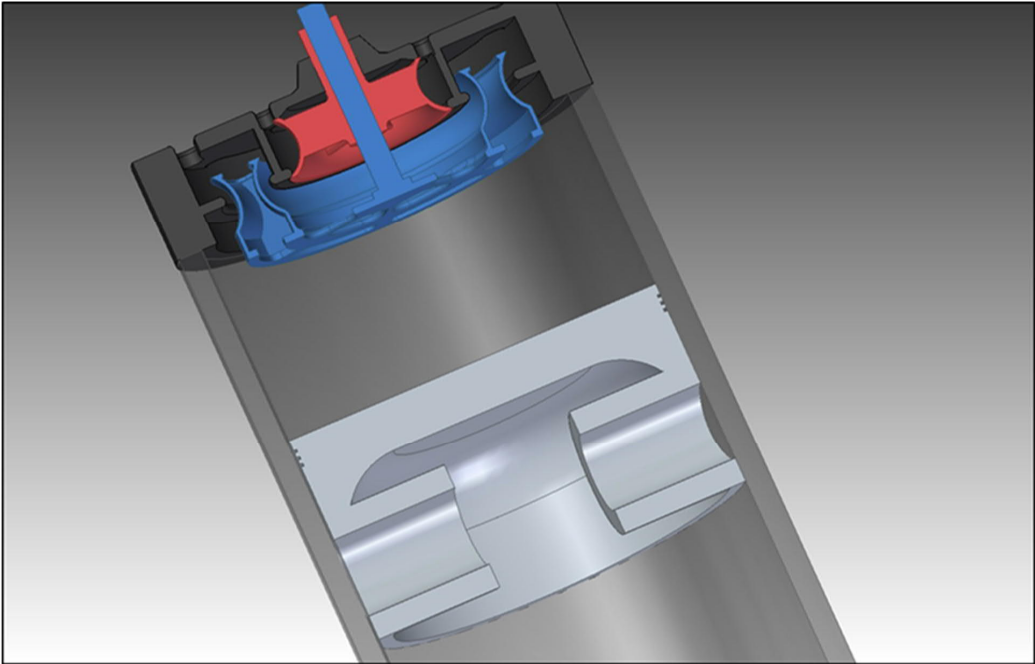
Layout of valves in cylinder head and piston in the cylinder; admission valve open, exhaust valve closed.
